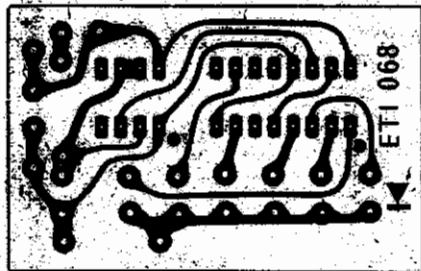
Printed-circuit board layout for the LED dice. Full size 55mm x 35mm.
